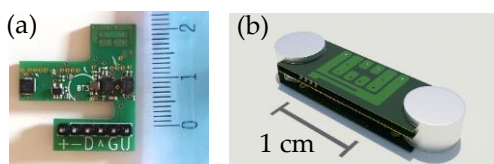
Design of one sensor node without electrodes: (a) current prototype PCB (b) CAD of the final sensor with folded PCB measuring 24 mm x 7 mm (with 3.6 mm thickness).
